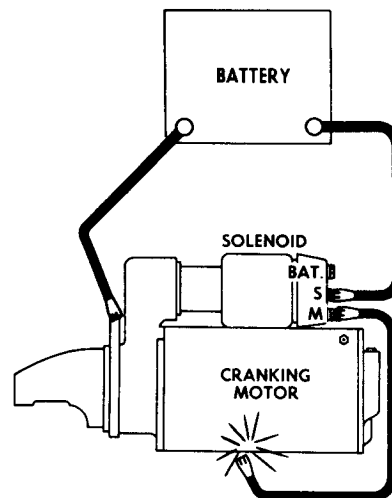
Circuit for checking pinion clearance. (Types shown in Figures 4 and 5.)
